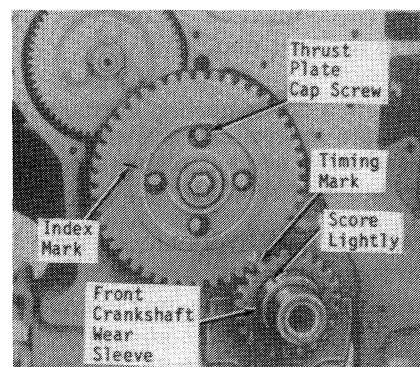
To remove oil seal wear sleeve, score sleeve with a blunt chisel and pry from crankshaft. Timing "V" marks must be aligned as shown when installing timing gears.
